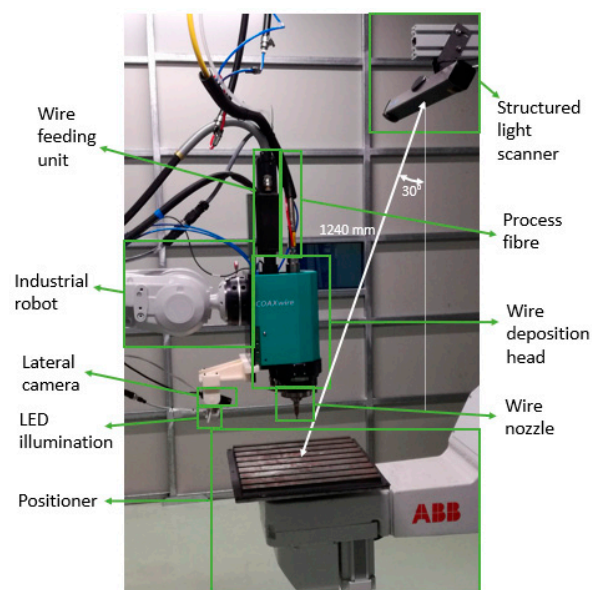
Experimental setup of the laser metal wire deposition (LMWD) robotic cell.
